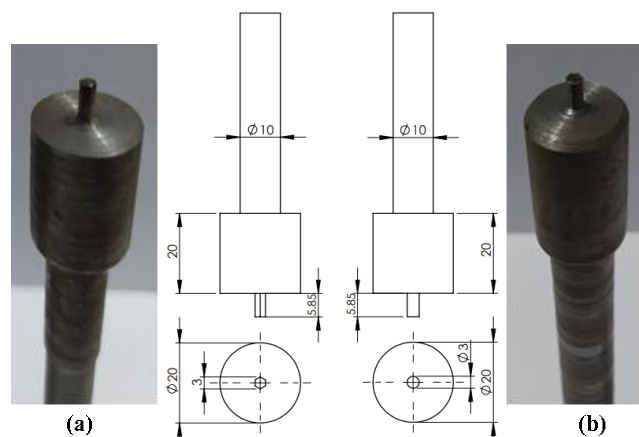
Welding tools: a) cylindrical pin; b) hexagonal pin.
